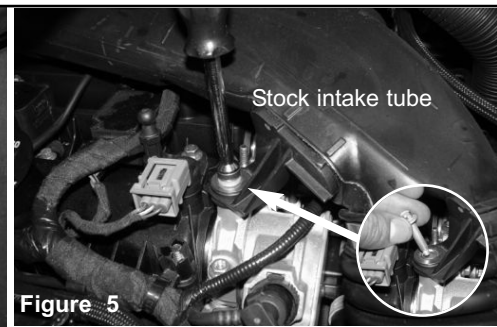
Locate the screw holding in the upper half of the stock intake tube. Loosen using 8mm nut driver or socket. Remove the screw.
